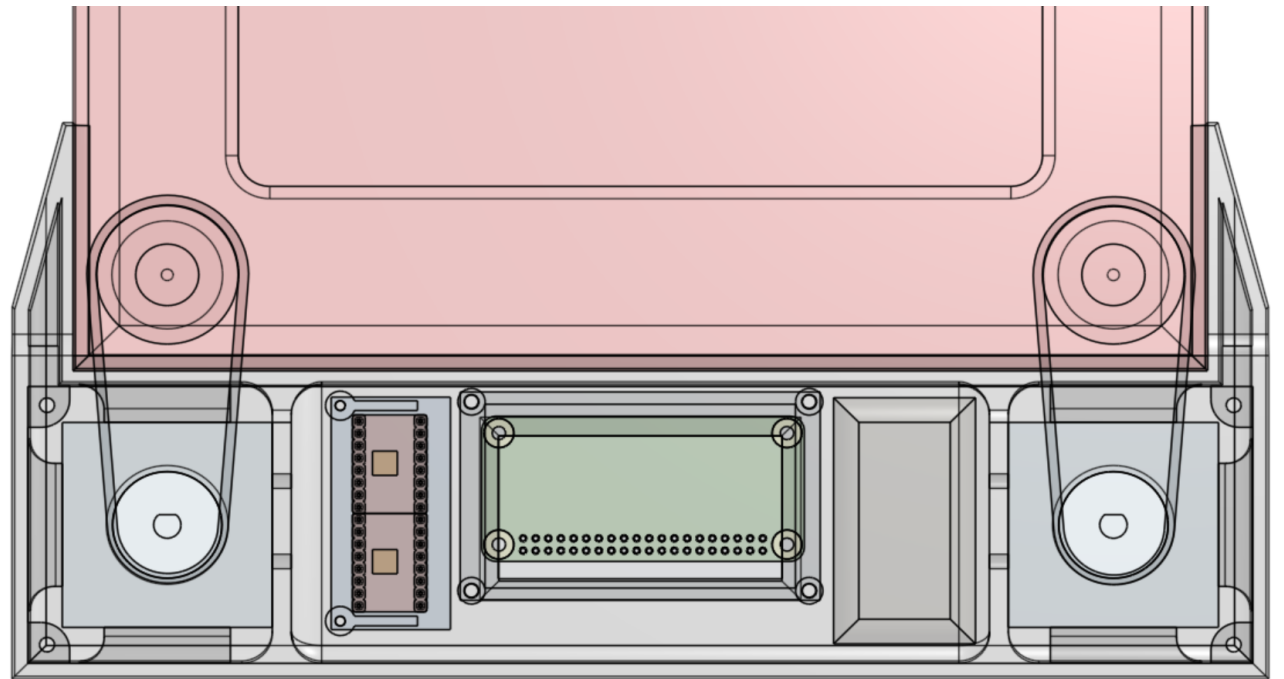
Back view of the Mech-a-Sketch design showing motors, electronics, and the case layout
